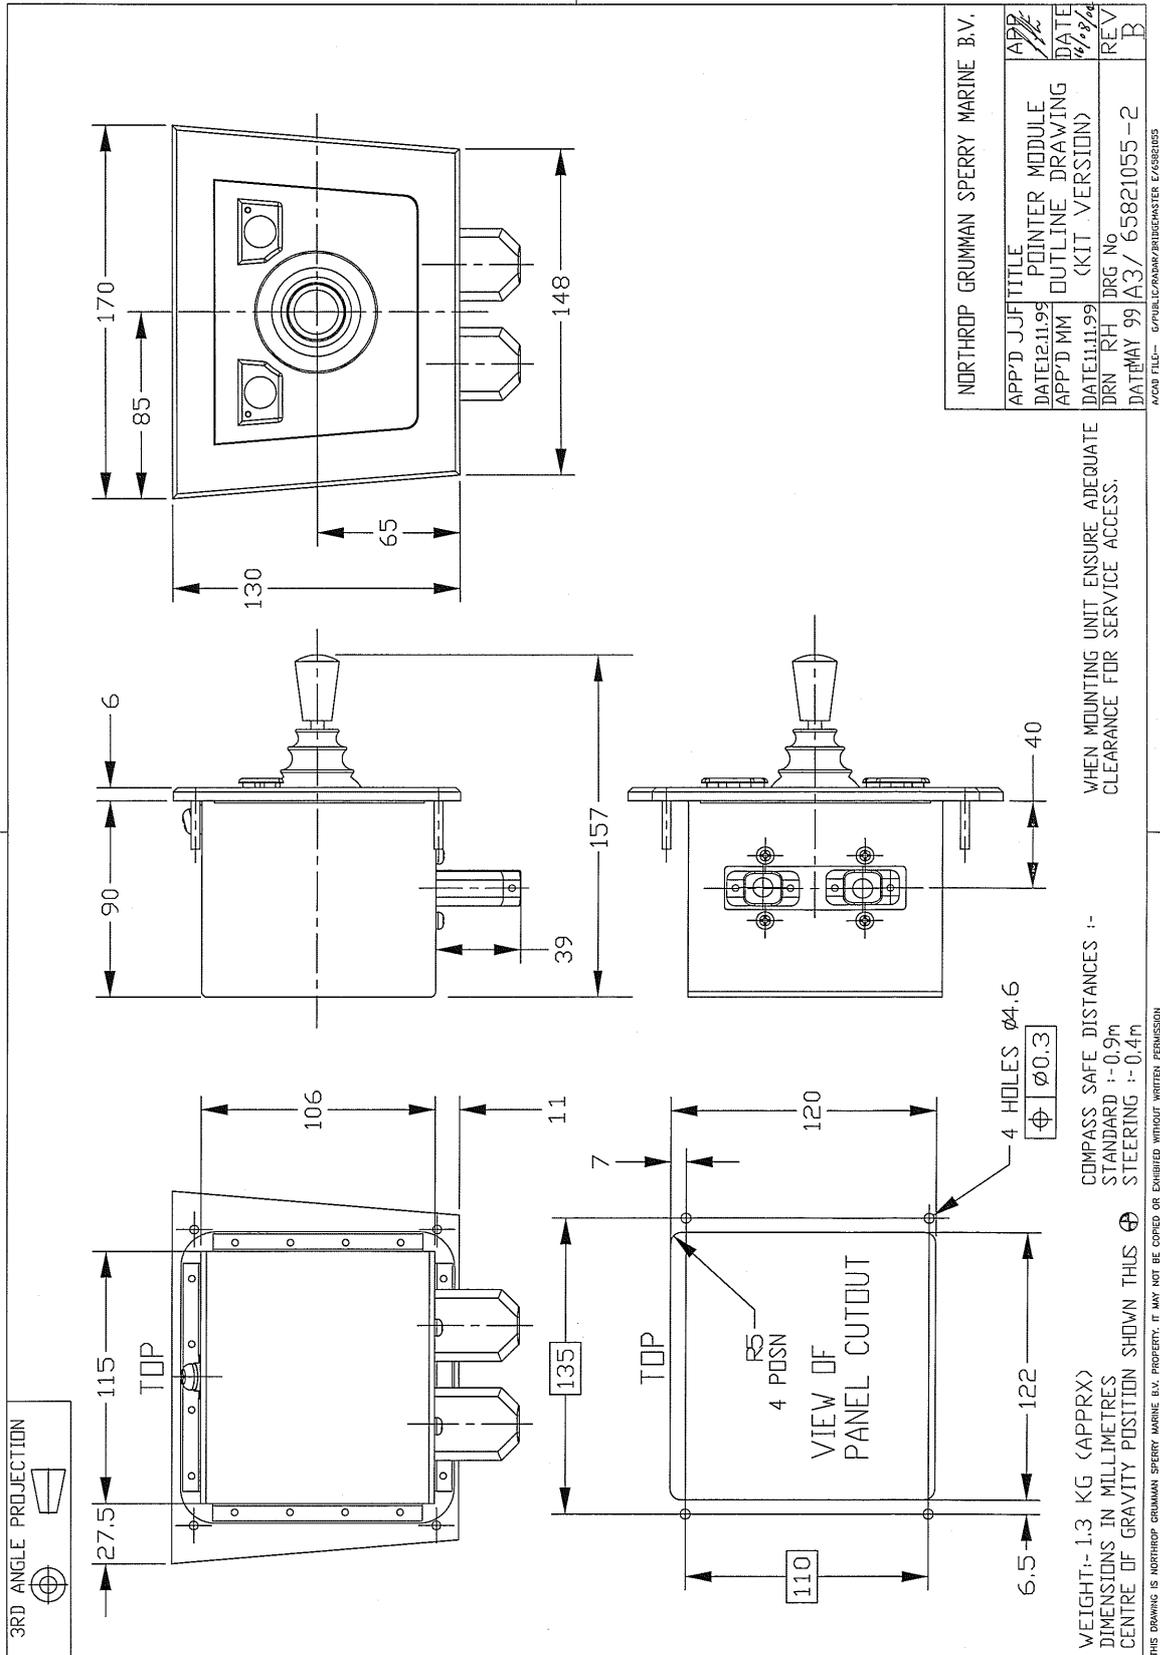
Joystick Module Outline Drawing (170mm version)
